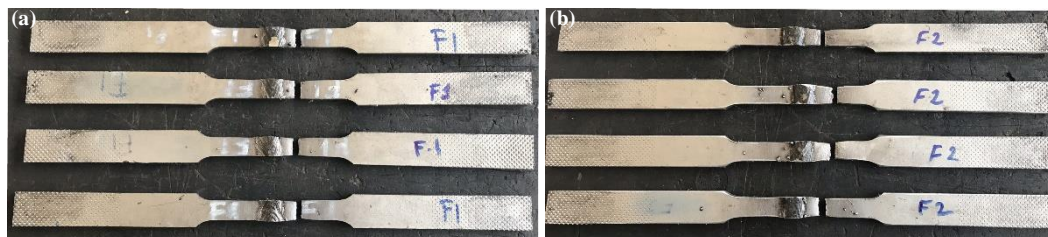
Macrographs showing the fracture locations in the tensile test specimens extracted from: (a) lower heat input joint and (b) higher heat input joint.
